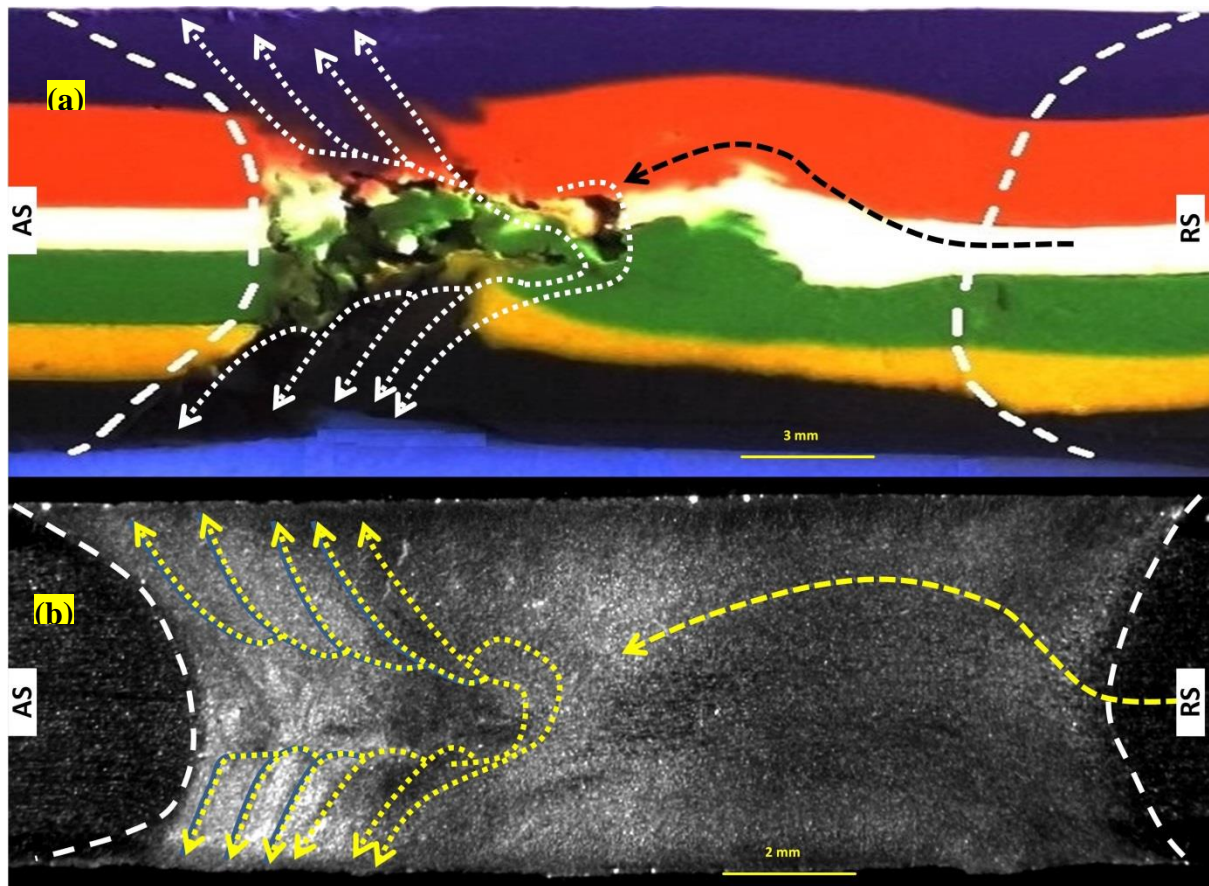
Cross-section of the BFSW weld, (a) plasticine sample (50 rpm, 50 mm/min) and (b) aluminium weld (650 rpm, 400 mm/min).
